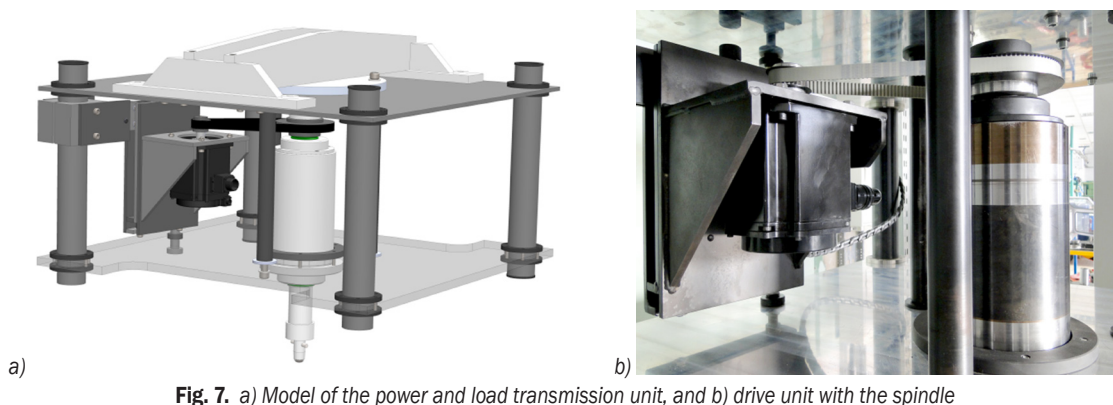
a) Model of the power and load transmission unit, and b) drive unit with the spindle
